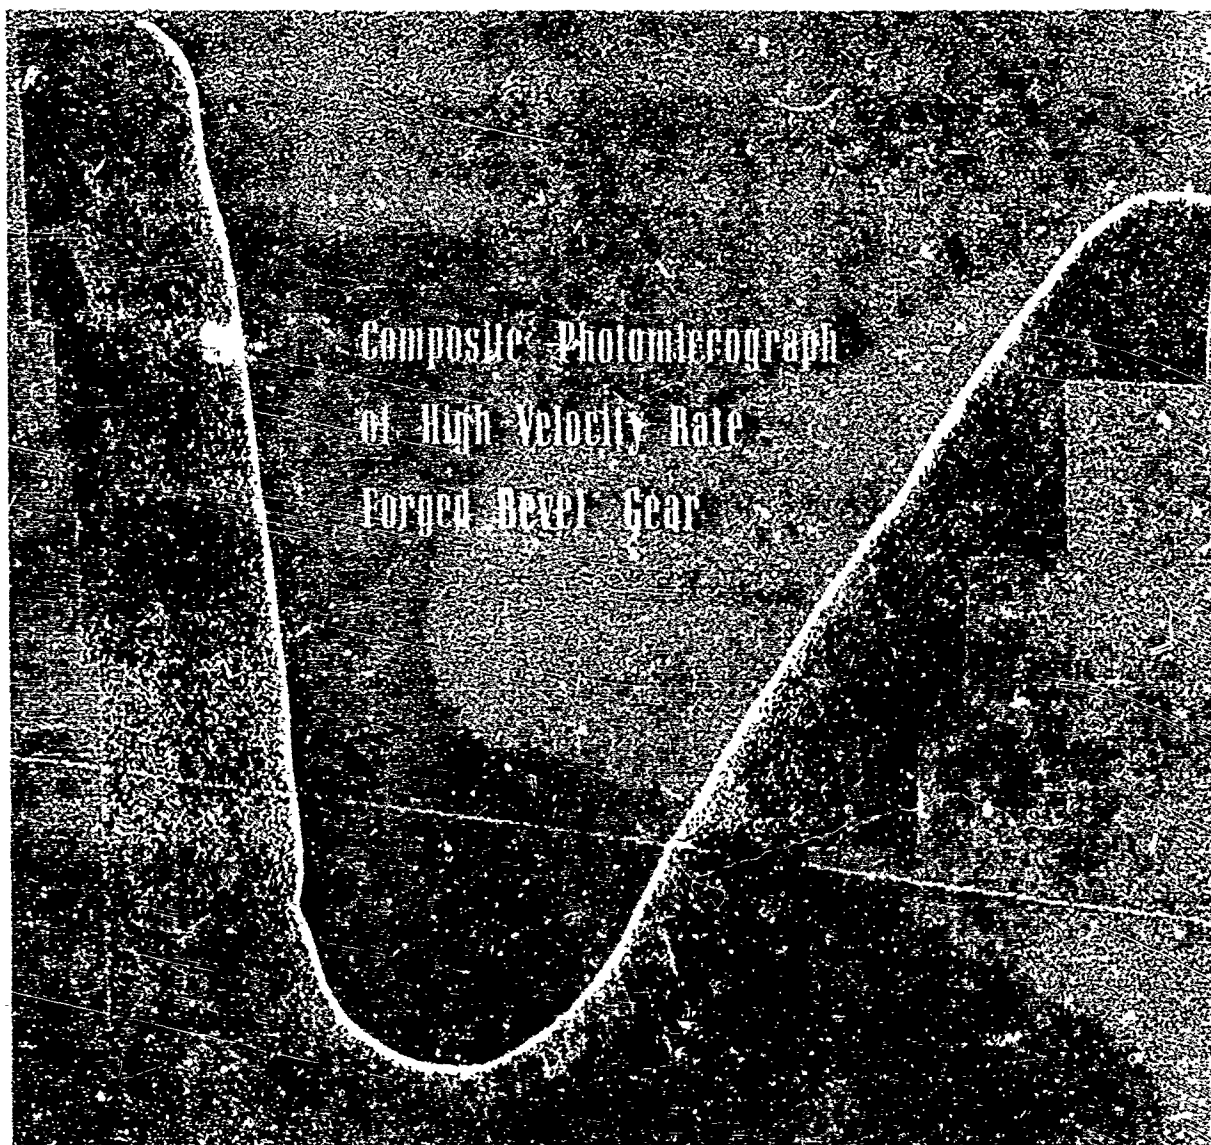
Flow Around the Tooth Root and Flank of the Spiral Bevel Gear Forging
